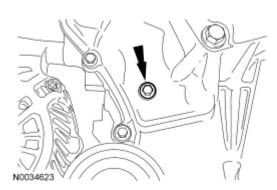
Identifying Special Tool Courtesy of FORD MOTOR CO.
